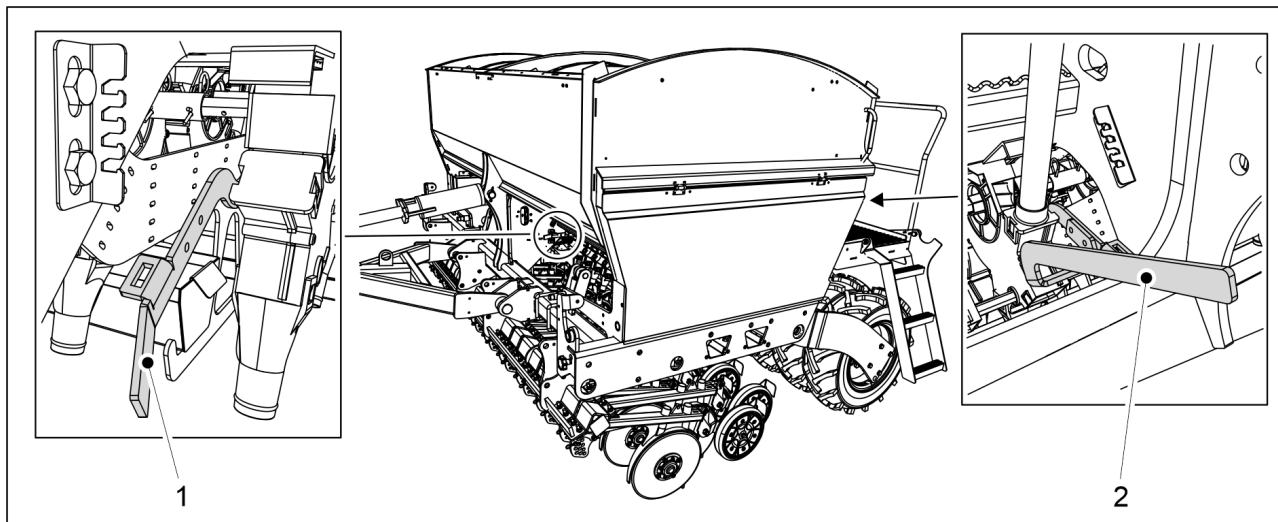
206. Opening the bottom flaps of the hoppers
